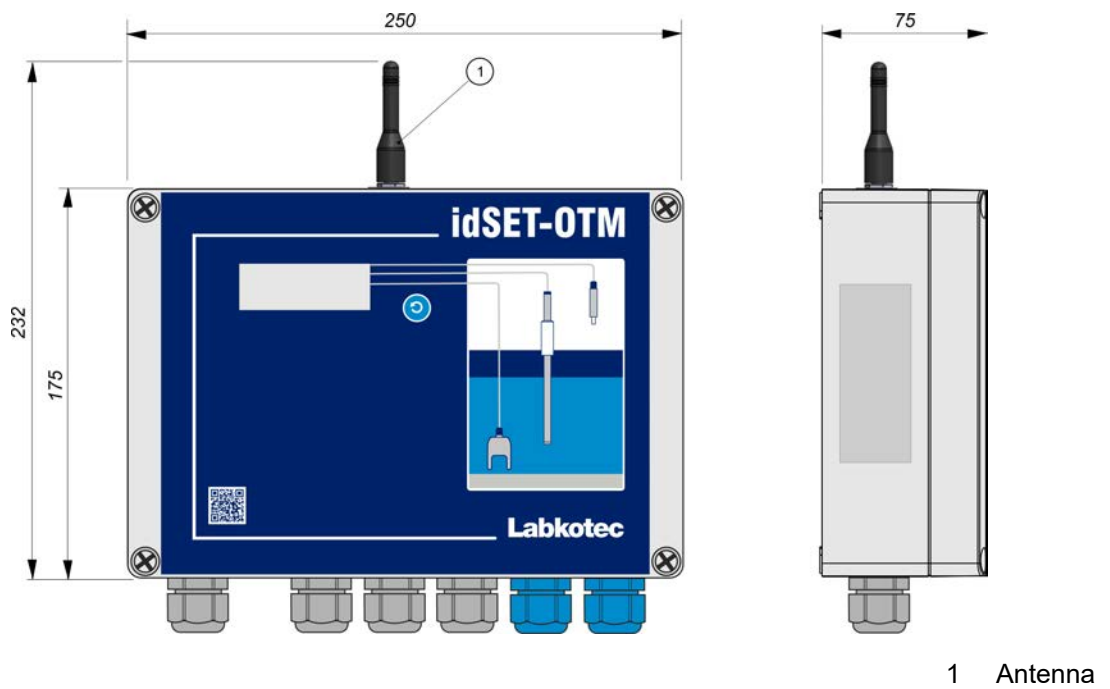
Dimensions of the idSET-OTM control unit (mm)
